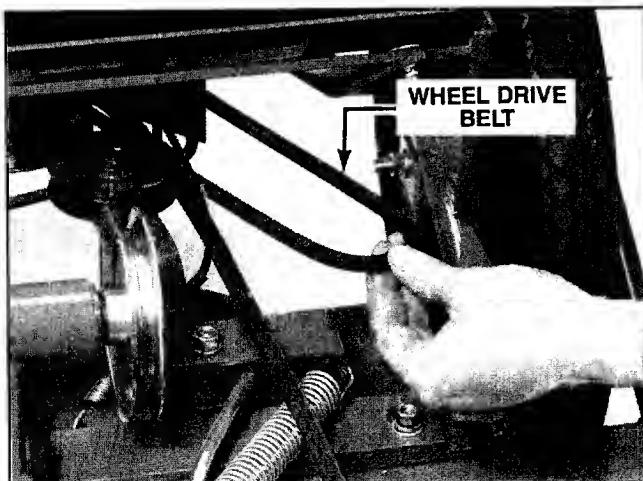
Hold wheel drive belt in flat position (traction drive mounting bracket removed for photo clarity only).
